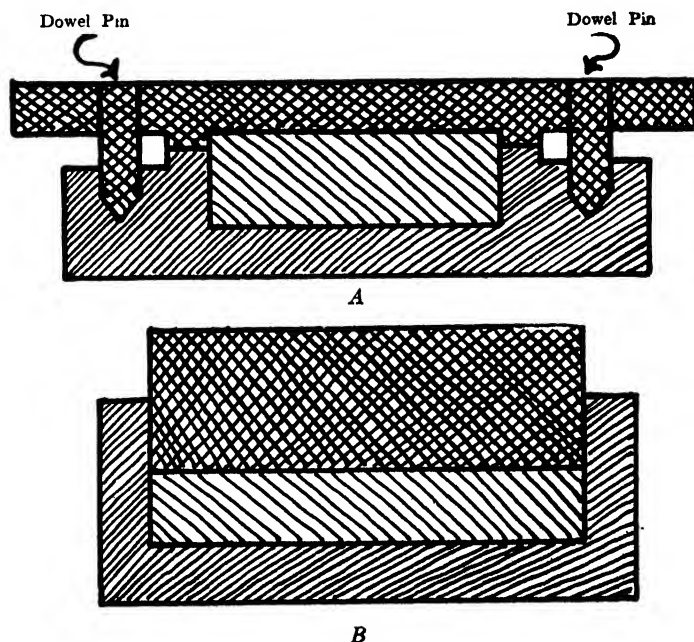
(A) "Flash" or "Open" Mold. (B) "Positive" or "Closed" Mold.
